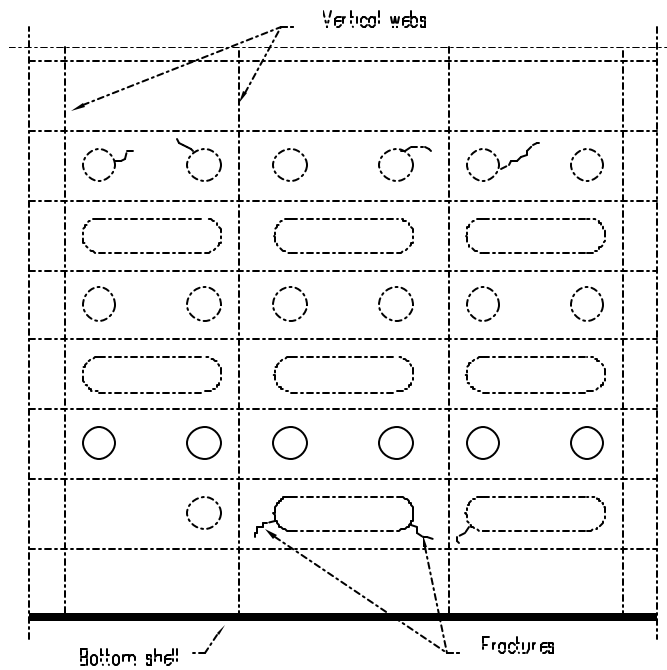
Buckled and fractured centreline vertical web and stringer in way of intersection.
